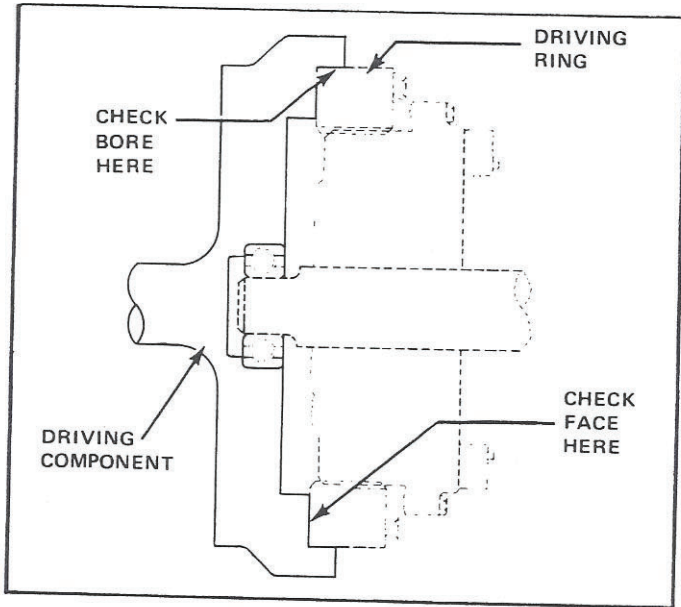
Air Operated Clutch with Driving Ring Bolted to the Driving Component (Typical Installation).
